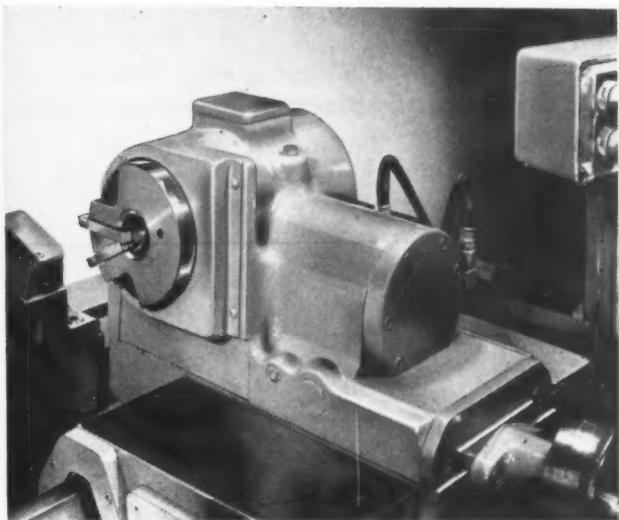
Close-up view of tooling for rough- and finish-turning sleeve bearings. At end of roughing cut, speeds and feeds change automatically, tool is indexed, and carriage is fed back for finishing cut
